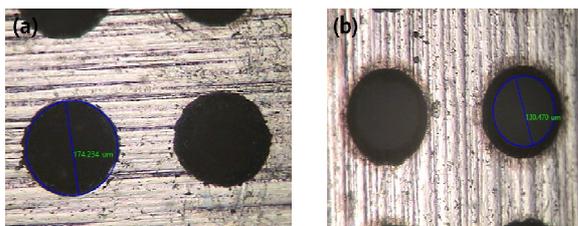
Optical microscope images of machined stencil mask with 80µm dry film photoresist patterned after (a) 480s and (b) 540s wet etching process
